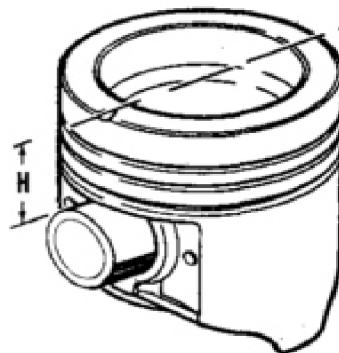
Three different crown heights (H) have been used in 4.4 inch bore gasoline engines; and two different crown heights used on 4.4 inch bore diesel engines. If in doubt, measure crown height to be sure correct piston is being installed.
